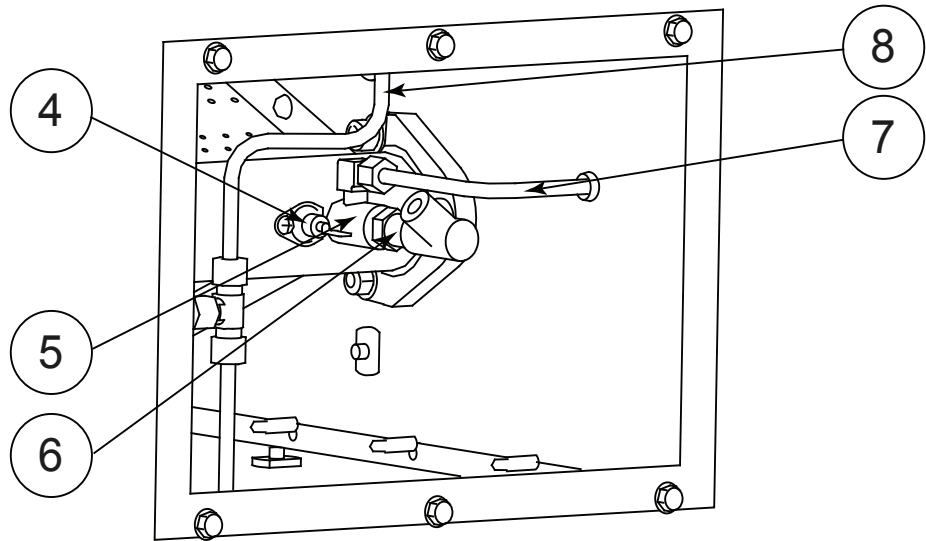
B - Detail - Inside View of Burner Housing Rear - 24V Burners
